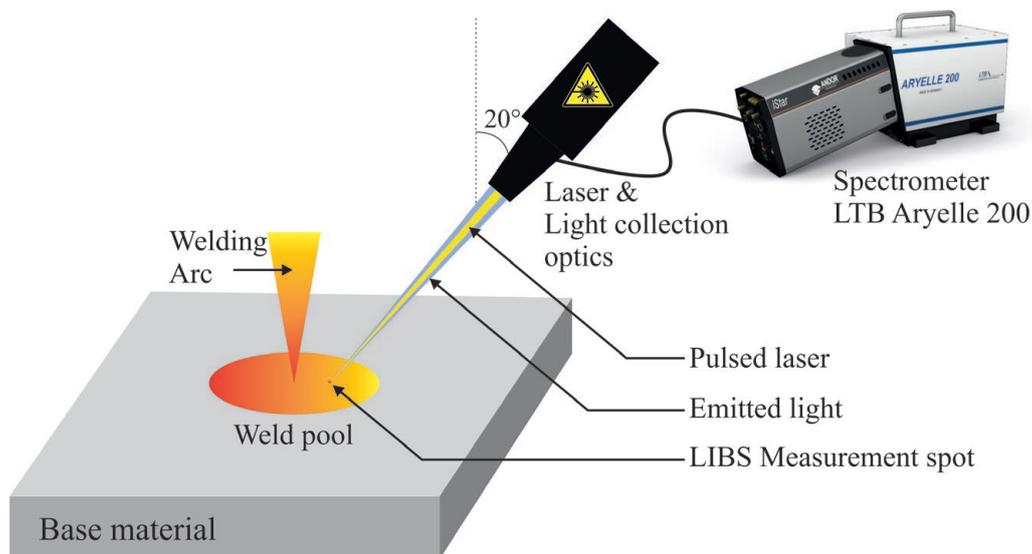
Experimental set-up of the LIBS monitored welding system
